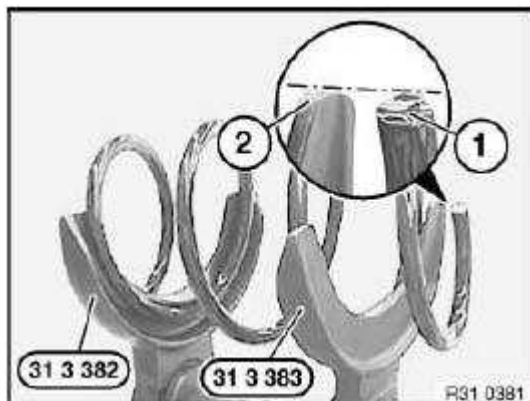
Coil Spring And Coil Spring End With Special Tools
